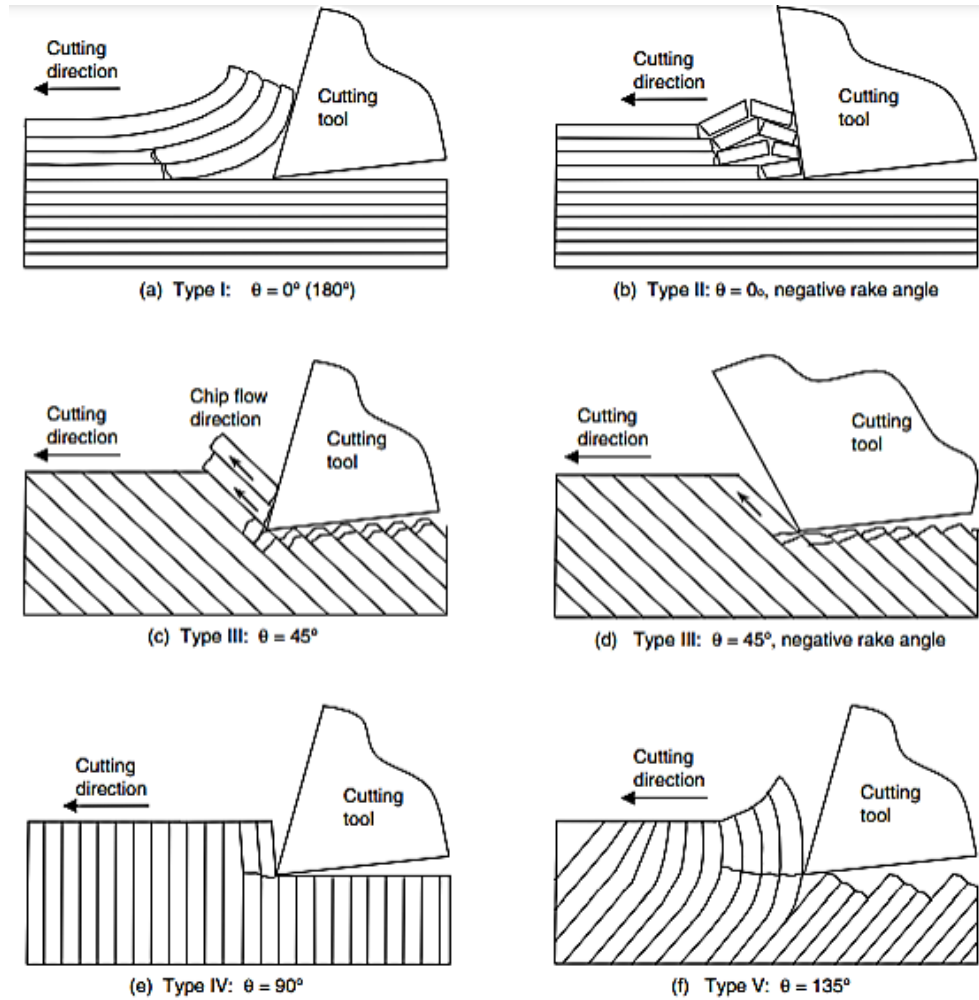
Cutting mechanisms in the orthogonal machining of CFRP: (a) Type I – Delamination Type Chip Formation; (b) Type II – Fiber Buckling Type Chip Formation; (c) and (d) Type III – Fiber Cutting Type Chip Formation; (e) Type IV – Fiber Splitting Type Chip Formation; (f) Type V – Fiber Fracture Type Chip Formation [40].
